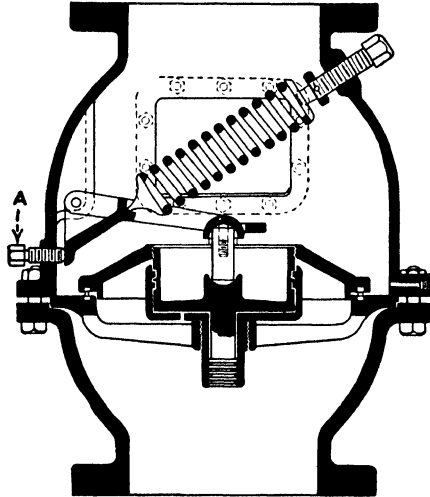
Back-pressure valve maintains exhaust pressure on process or heating lines.
